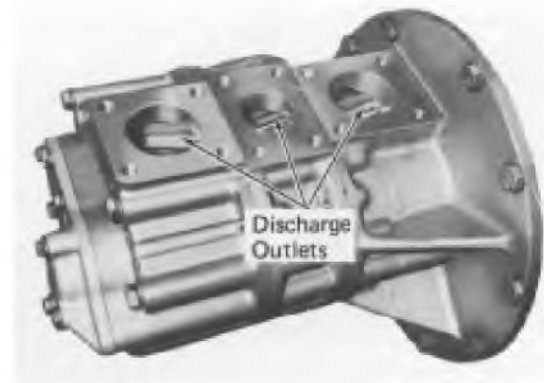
Scavenging Oil Pump (16 & 20-Cyl.)
